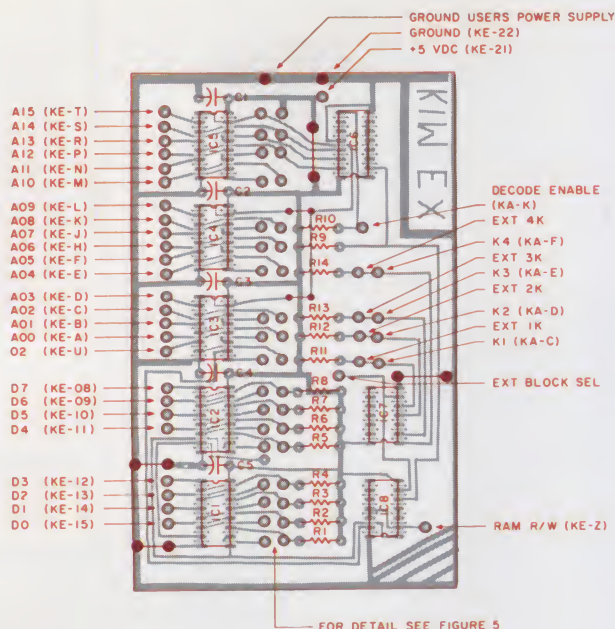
Parts-placement and wiring diagram for connections on the KIM Expander Board.
